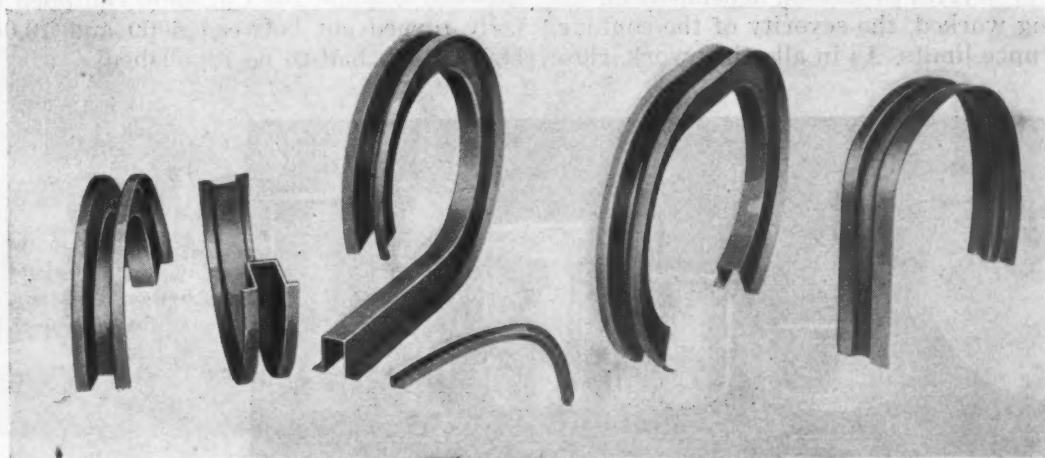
Steel Hat Sections Produced by Compression-forming on Contour Machine
